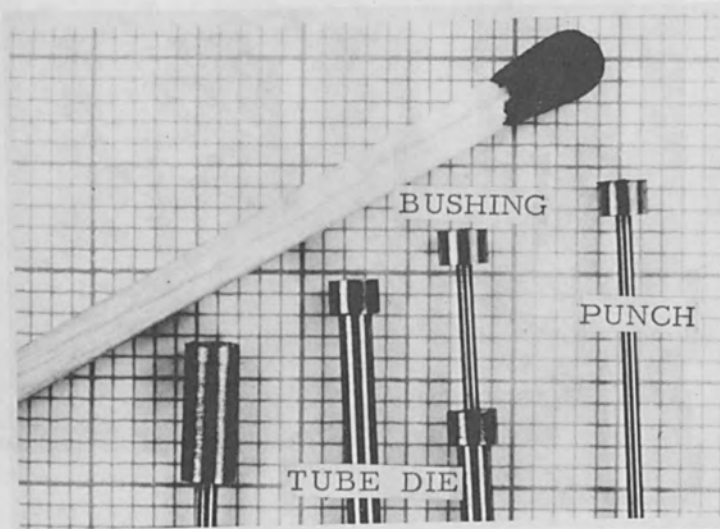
Bushings spotwelded to various slender punches and tube dies.
